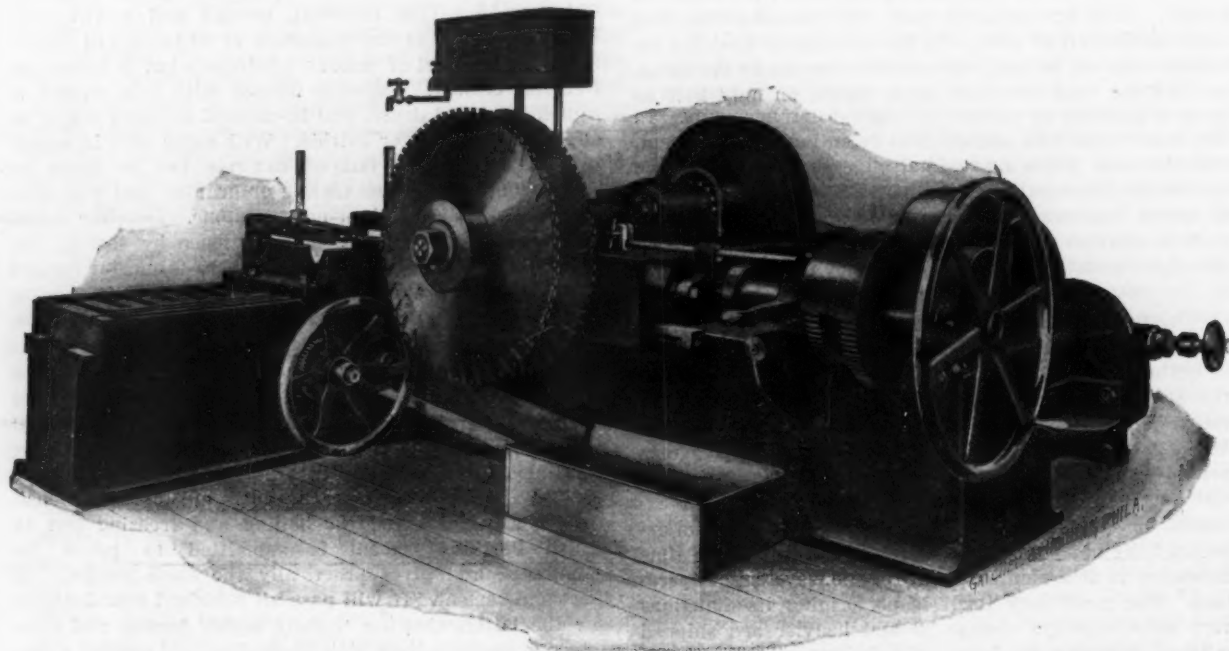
A 30-Inch Tindel Double Rotary Slotting Machine Built by the High Duty Saw & Tool Company, Eddystone, Pa.
